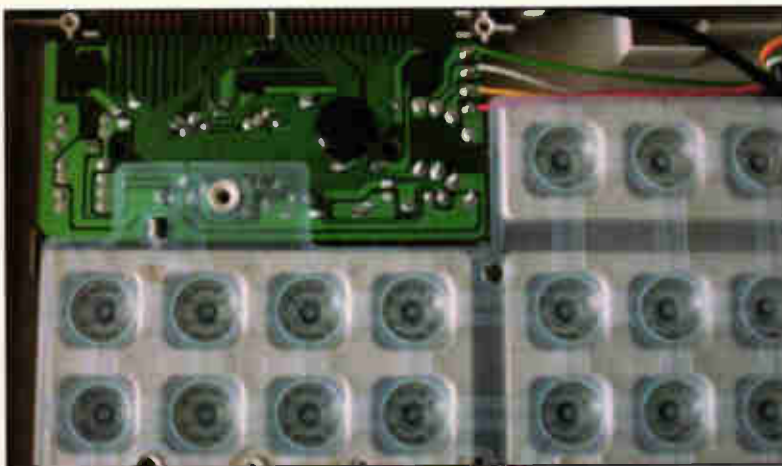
Picture of keyboard viewed from underneath showing pcb and clear rubber mat.
